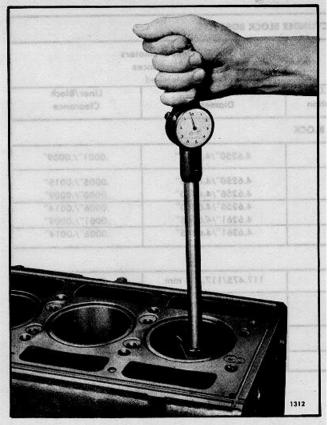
Checking Bore of Cylinder Line Using Tool J 5347-01
